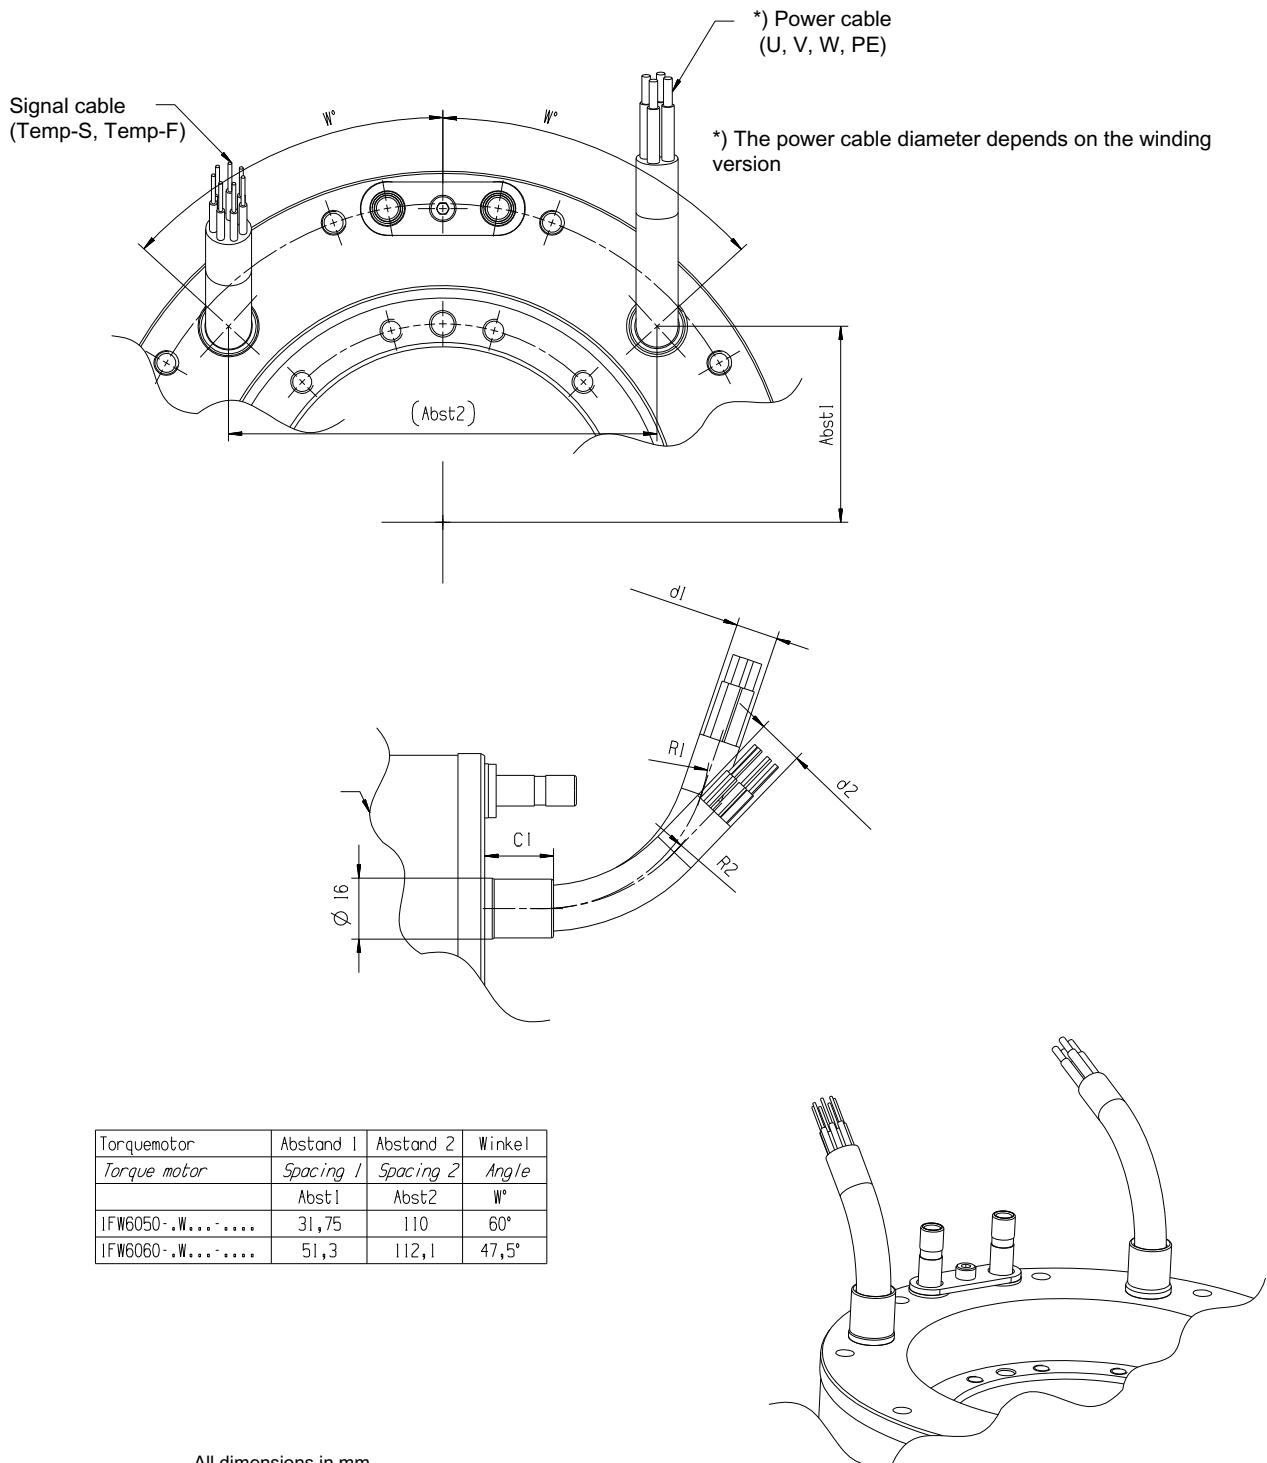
Axial electrical connection with sleeve for 1FW6050 and 1FW6060
